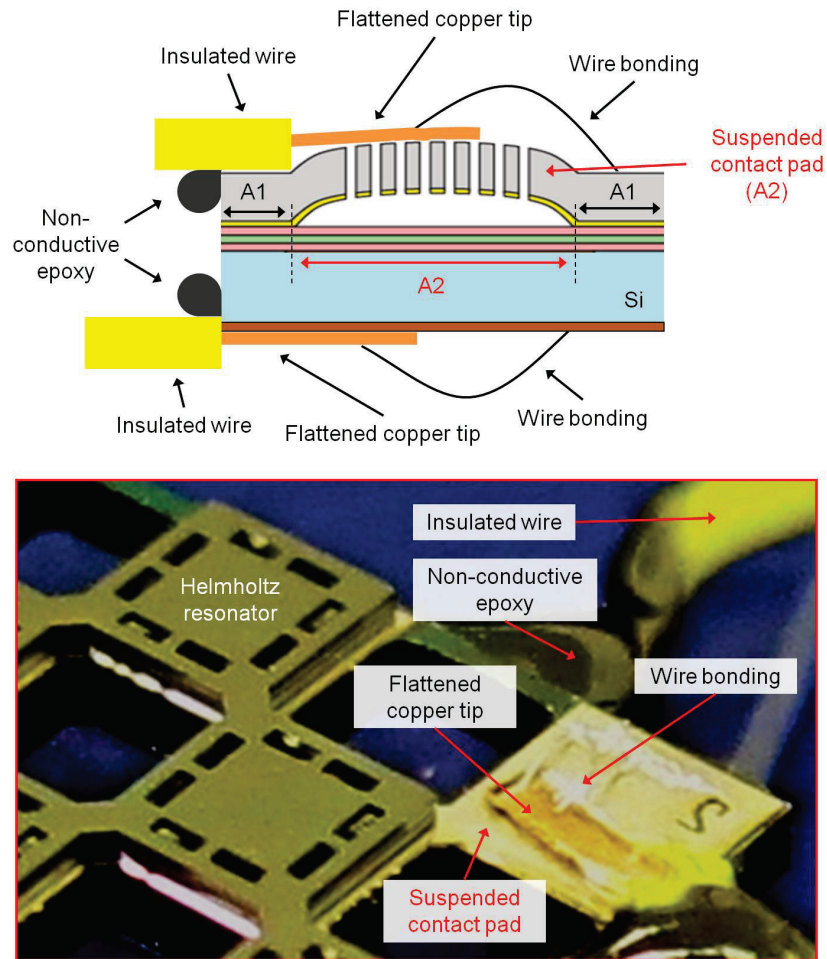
(Top) Illustrations of the cross-section of the contact pad with wire connections, and (Bottom) Photograph of the contact pad showing wire connections.
